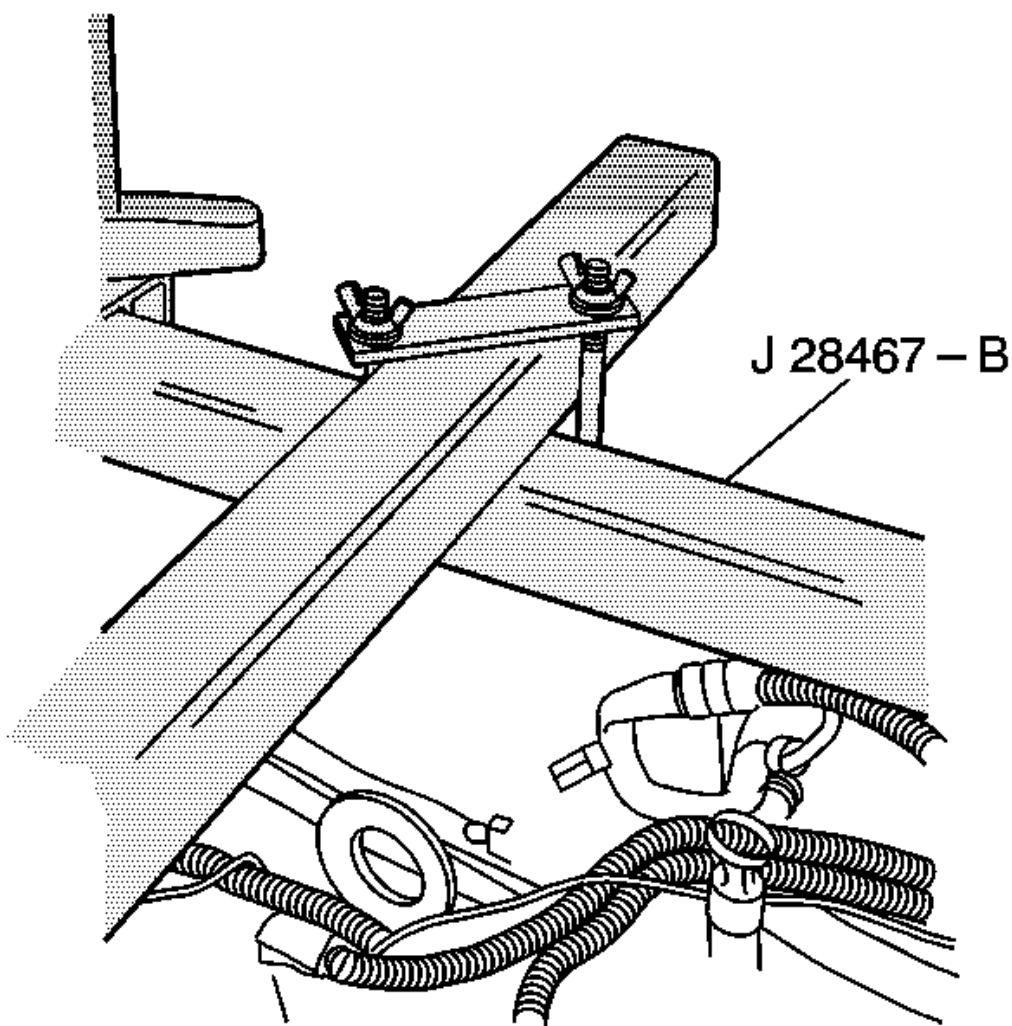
View Of Engine Support Fixture (J 28467-B)
